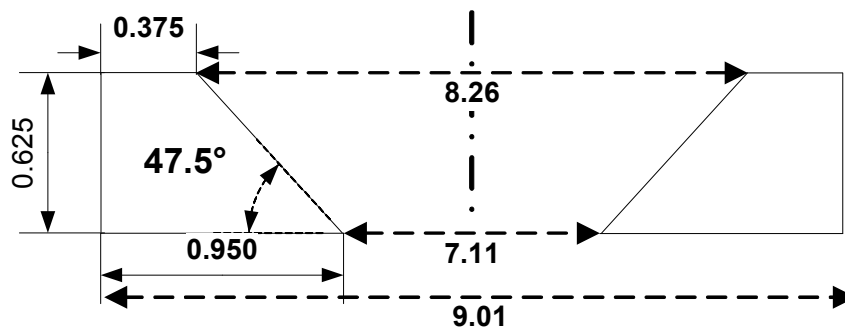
Dimension of the post acceleration insulator ring. Dimensions are in inches.
